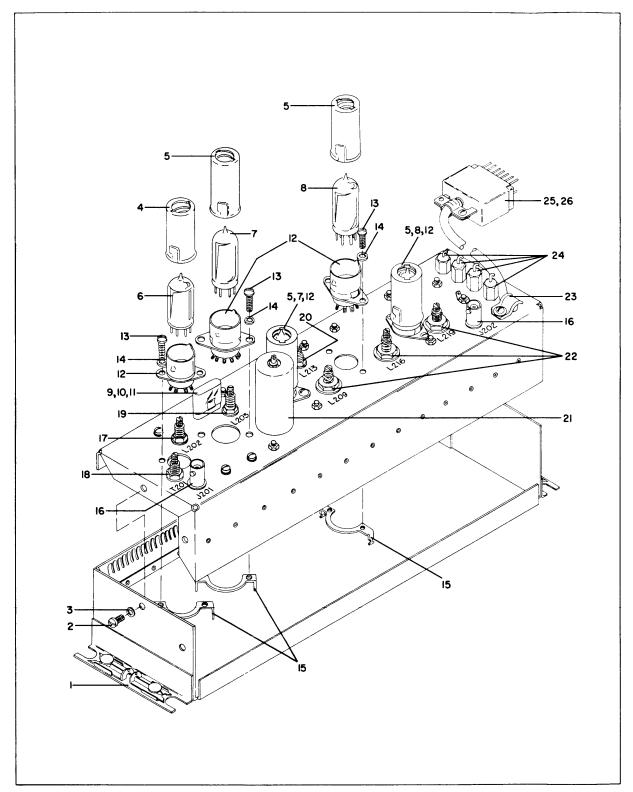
Narrow Band Chassis and Cover Assembly, Top Exploded View (Sheet 1 of 2 Sheets), Index Nos. 1 through 26
